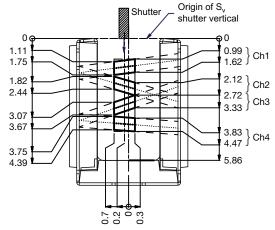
Top View Sensor, Channel Positions and Origin of Vertical Shutter, tolerances ± 0.2 mm
